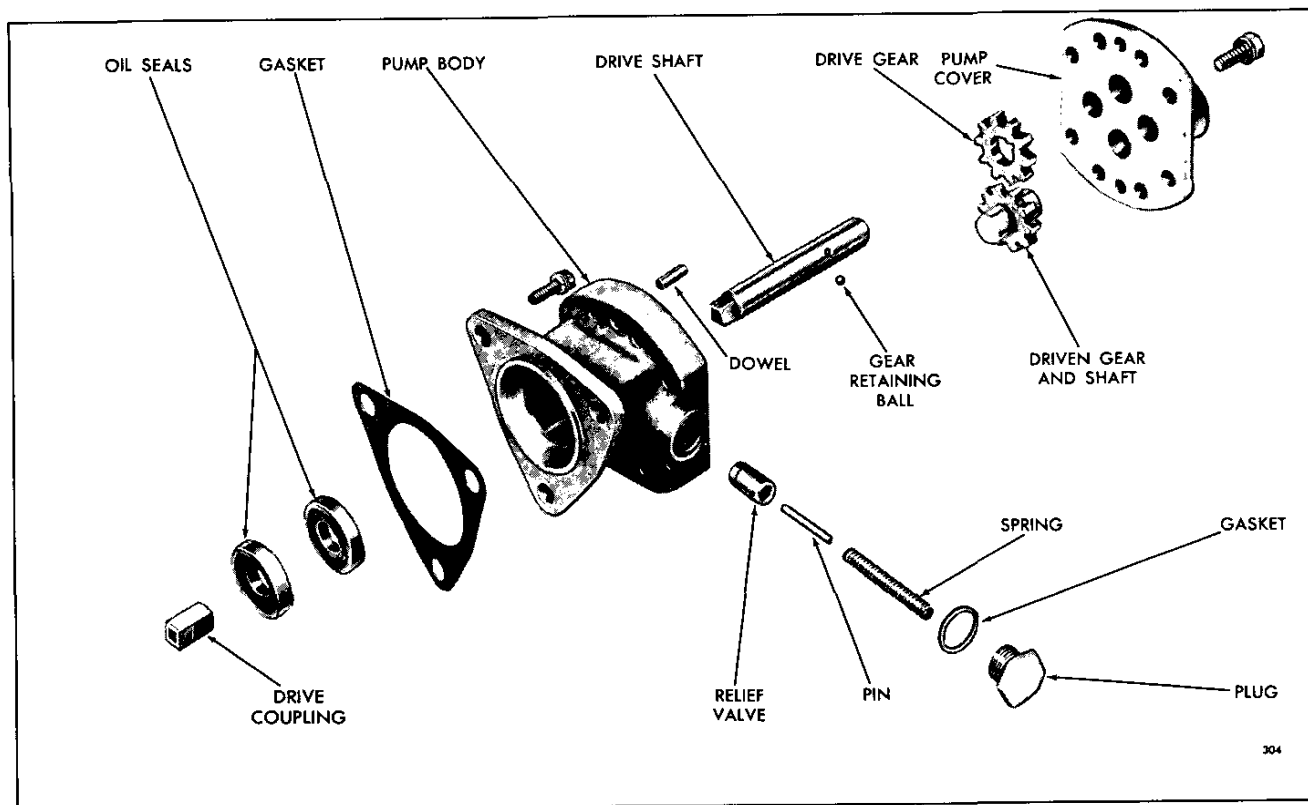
Fuel Pump Details and Relative Location of Parts (Right Hand Pump Shown)
